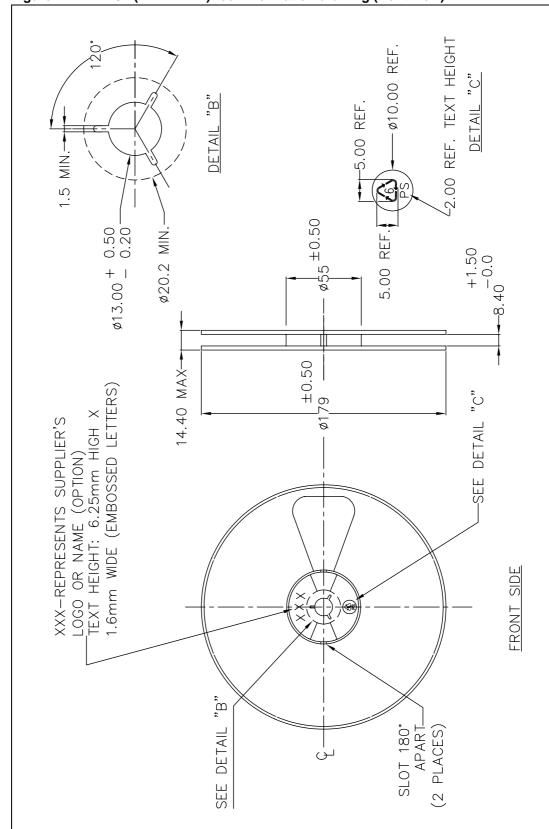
DFN6L (1.2 x 1 mm) reel information drawing (front view)
